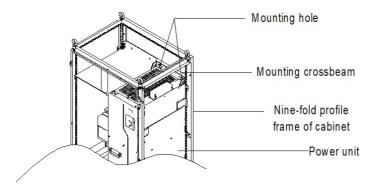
Three-dimension view of mounting a MSI270 280–500kW VFD in a cabinet
